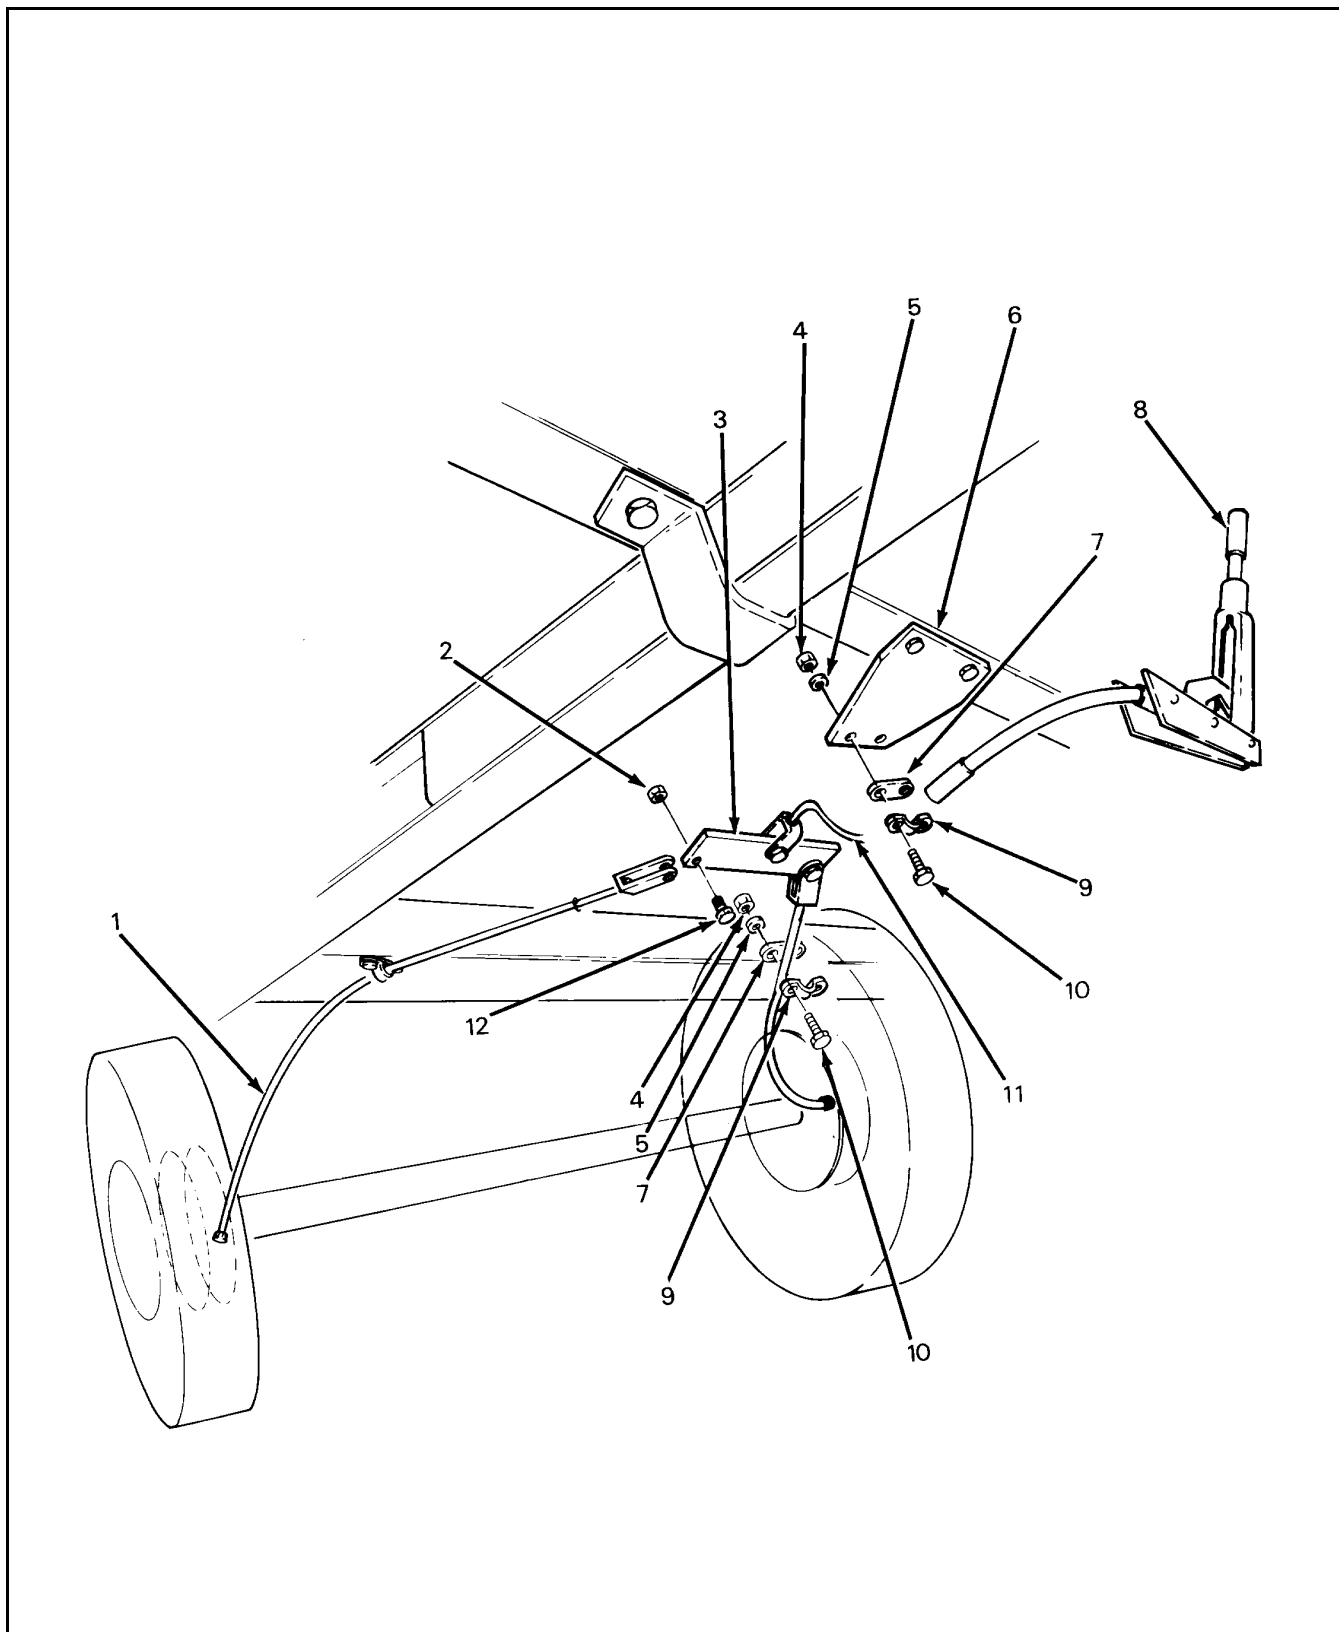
(Sheet 2 of 2) Park Brake Assembly
